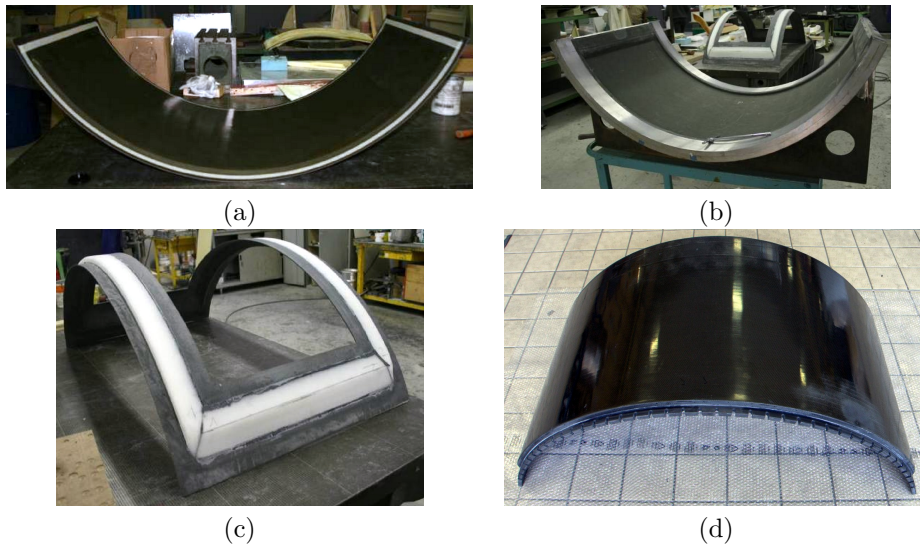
Pictures of honeycomb panel. (a) Inner skin. (b) Outer skin. (c) Reinforcement. (d) After gluing all the parts.
